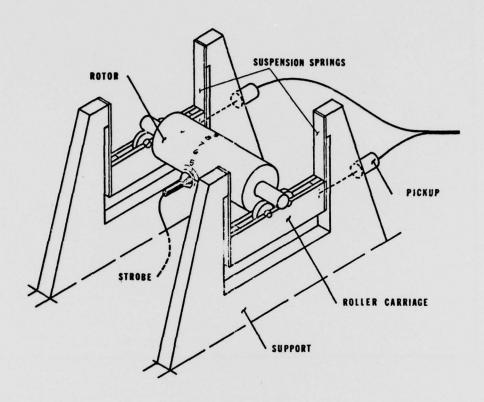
Machine with Electrical Indicating System Using Stroboscopic Lamp for Angle Indication.
